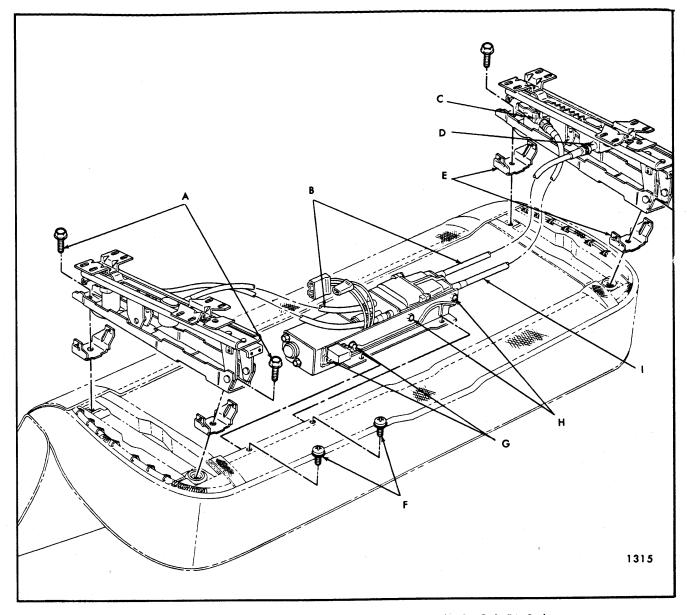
Front Seat Assembly - Four-Way Tilt - Buick "B, C & E" Styles
